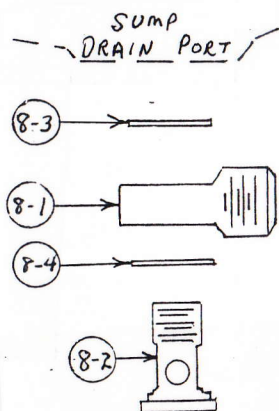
Sump Adapter - B-Type Assembly on Oil Sump Secondary Installation
